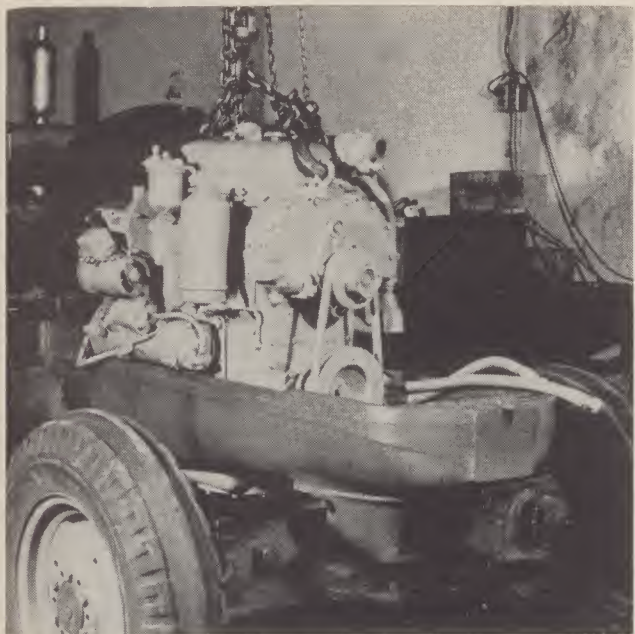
Hoisting a GM engine out of front frame by attaching a chain sling as shown.
